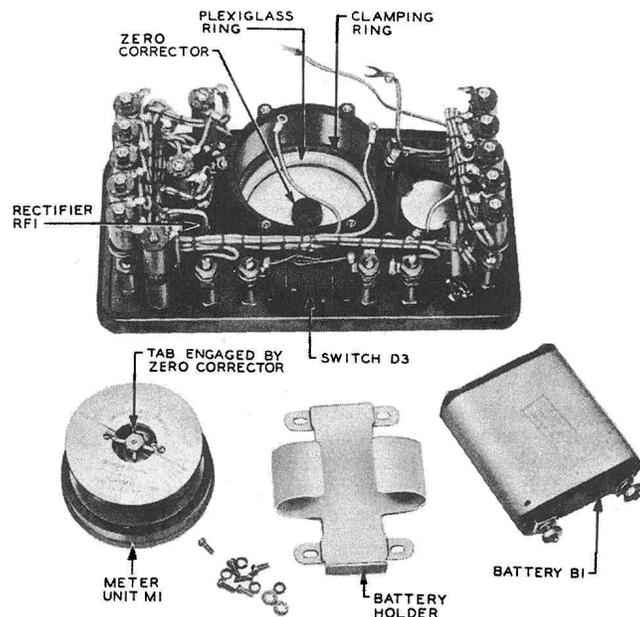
Location of Parts of M9B Meter - Battery Holder and Meter Unit Removed
